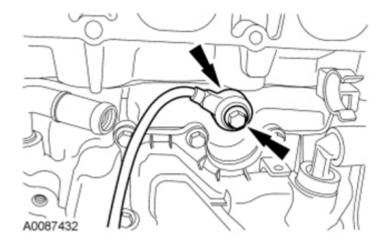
Locating Coolant Hose Courtesy of FORD MOTOR CO.
